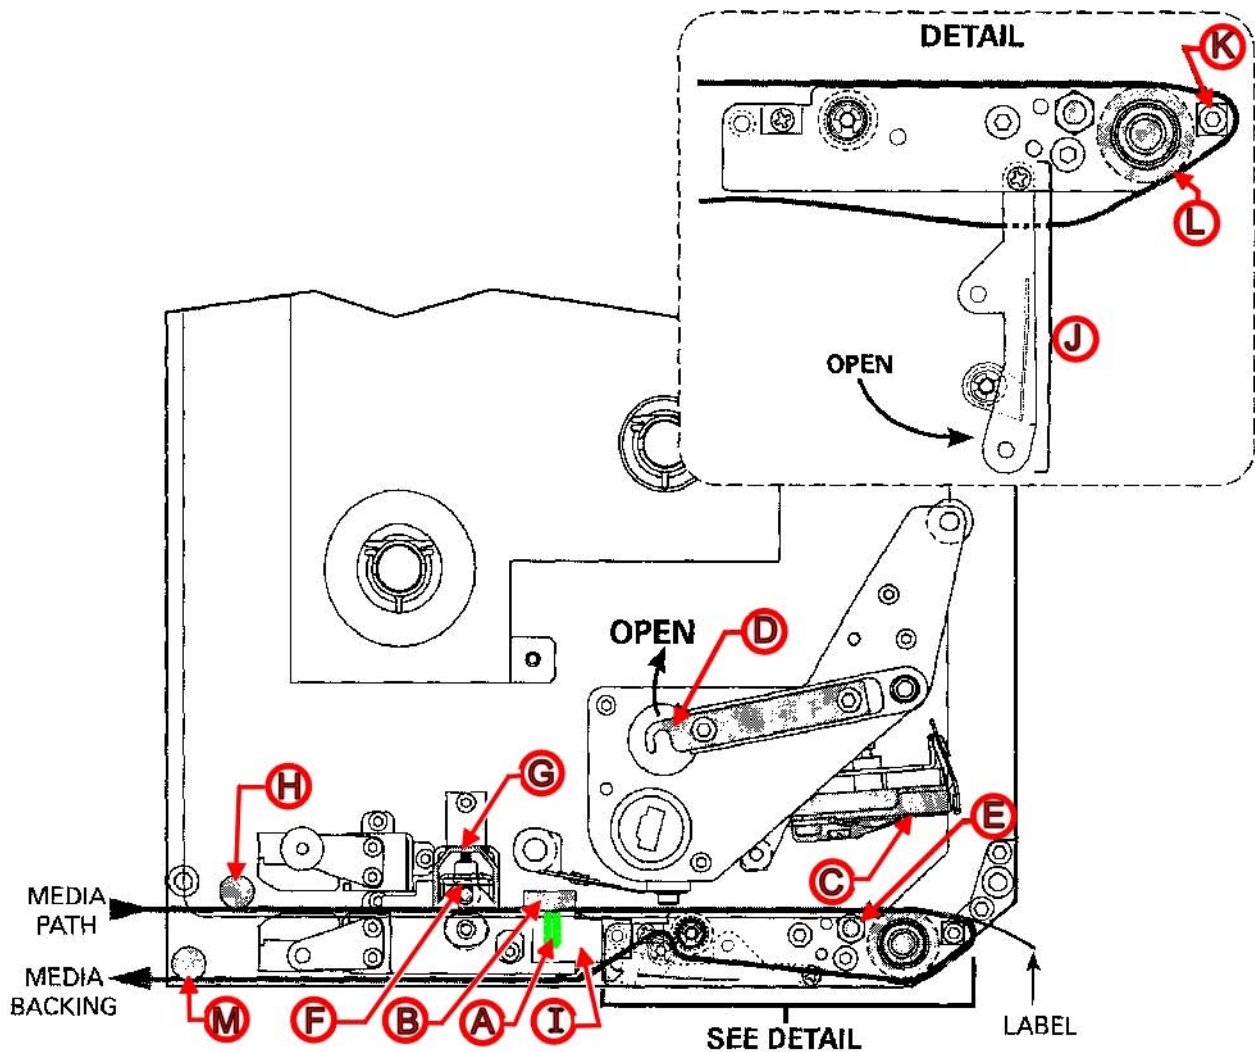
Annotated parts of the Zebra Print Engine. Front view
